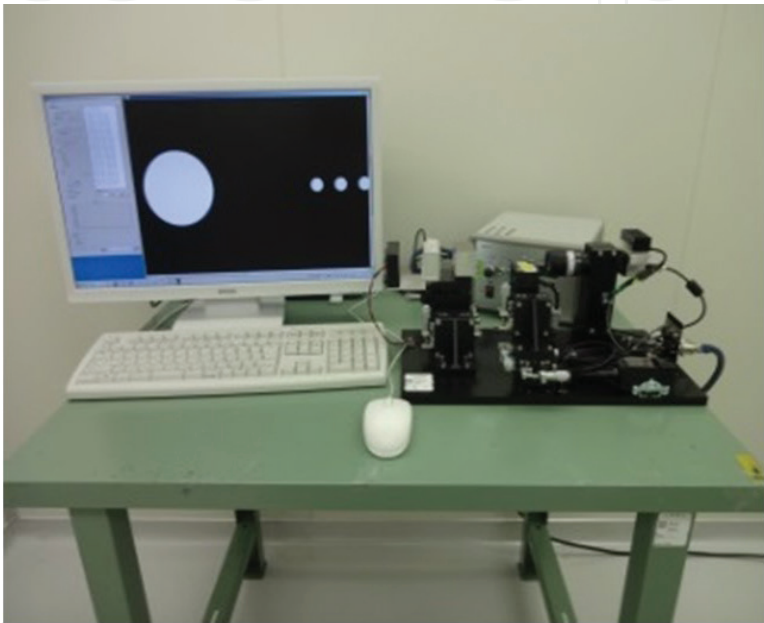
Photograph of the fabricated inspection equipment for MT ferrules.
